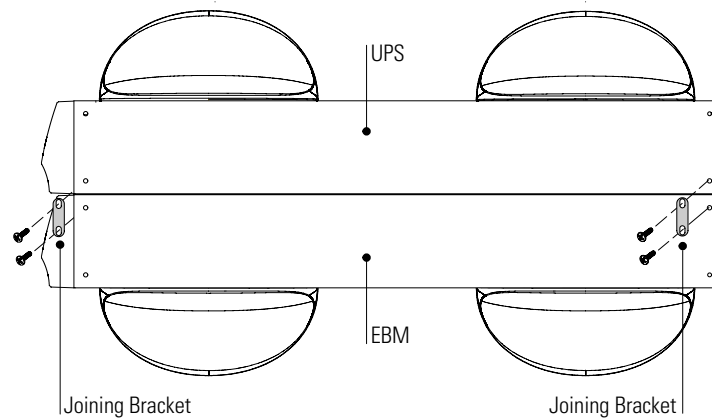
Installing the Joining Brackets (Top View with Pedestals)
